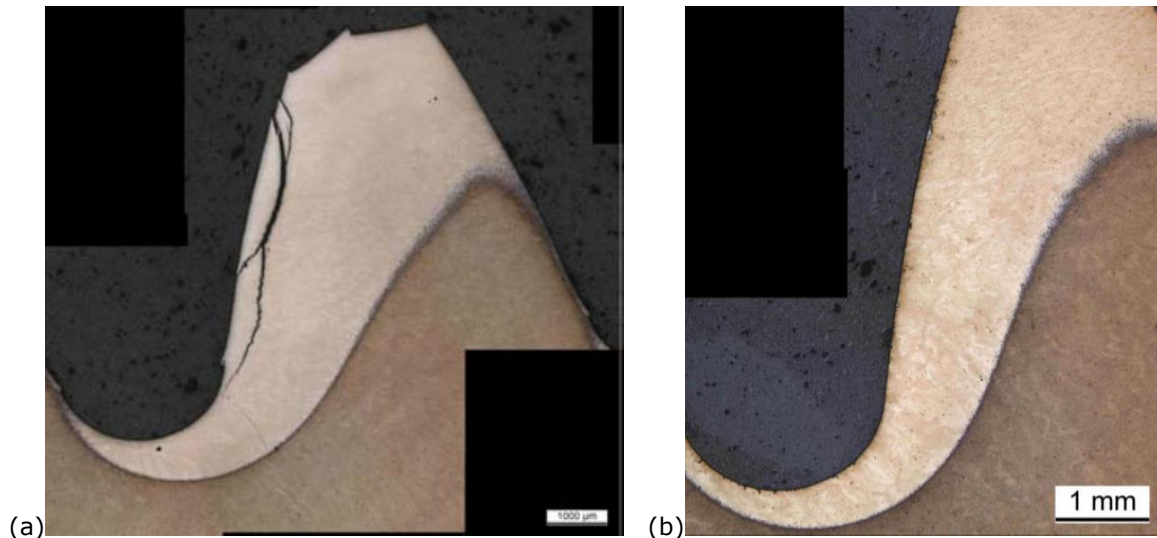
Cross sections of gear teeth. 8a) A tooth with the conventional chamfering process and (b) a gear tooth with a 1.5 mm chamfer manually ground at EFD.
